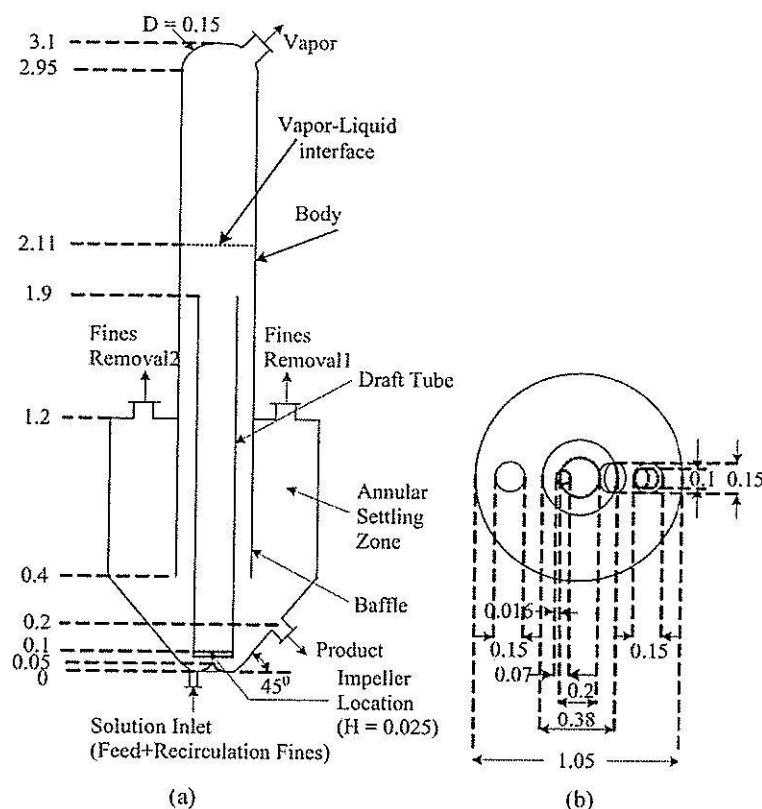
DTB crystallizer geometry and dimensions: (a) side view; (b) top view. Dimensions are given in meters.
